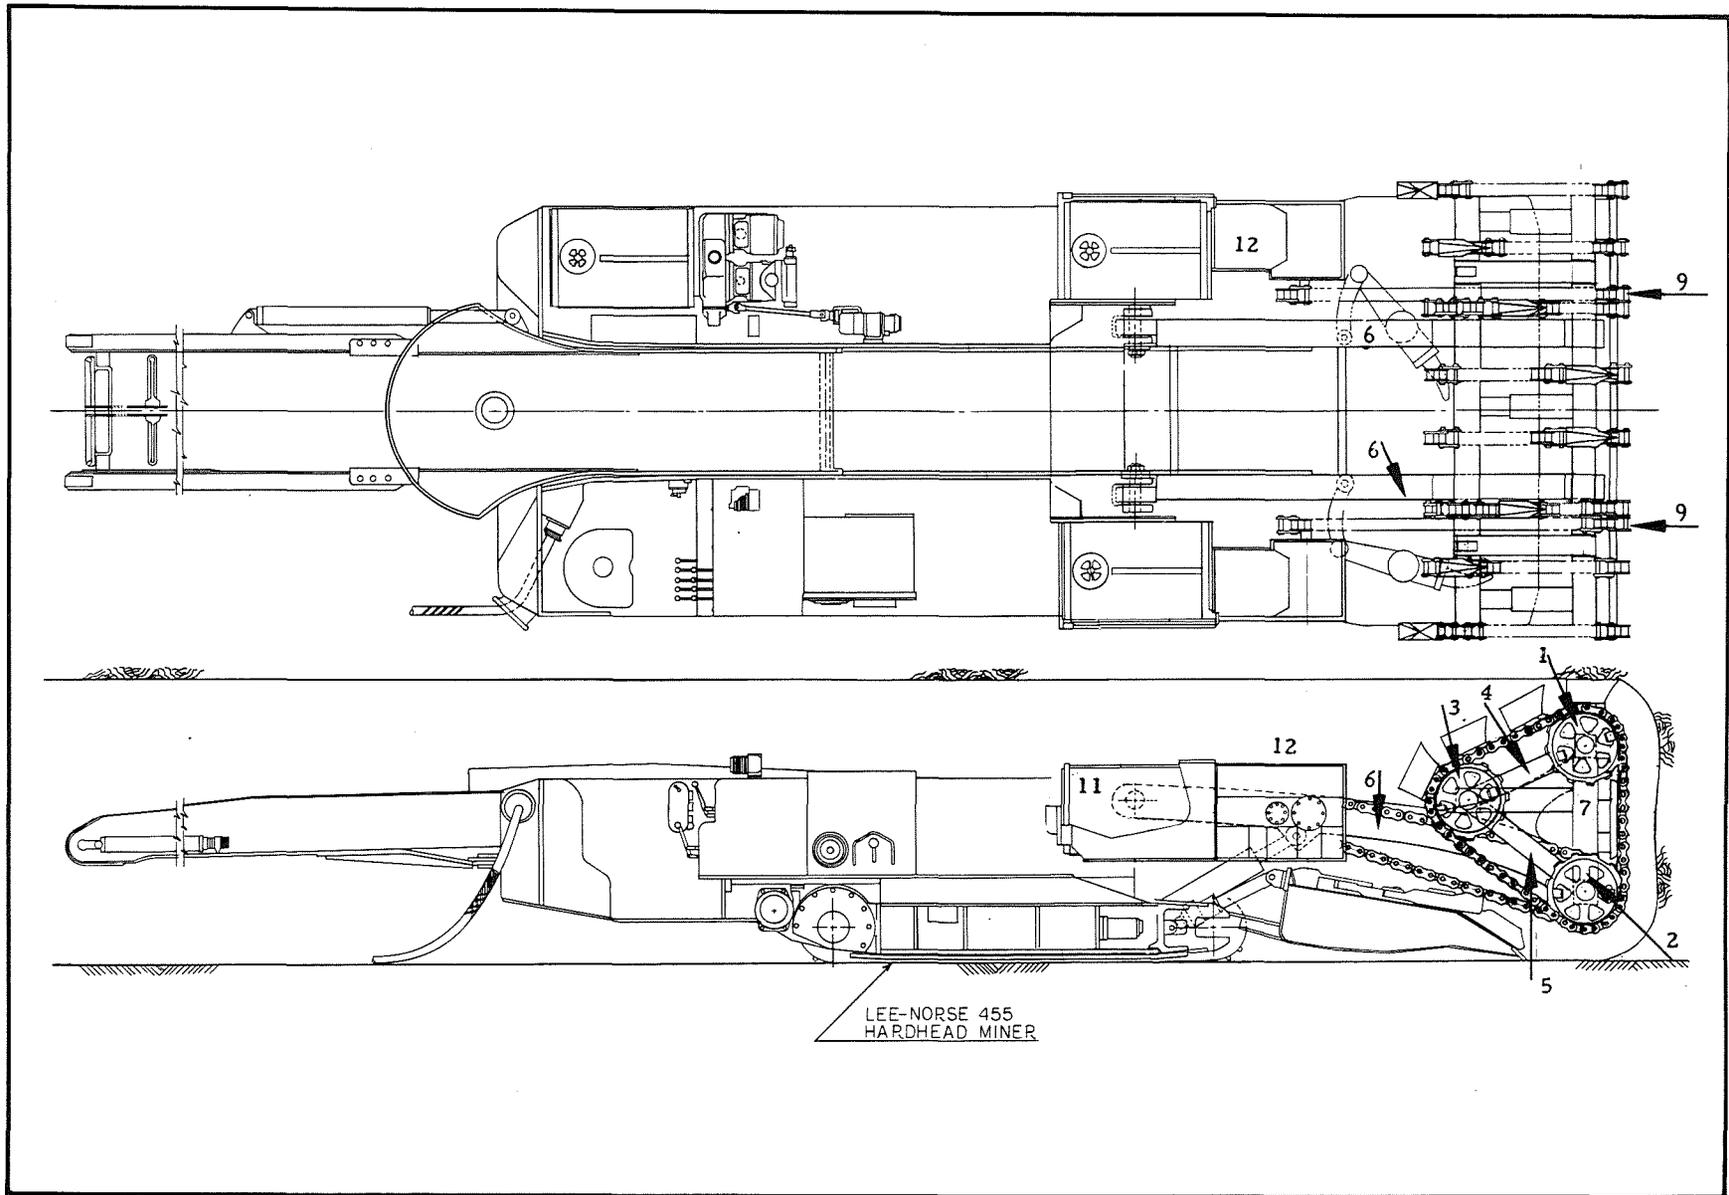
LAYOUR DRAWING, CHAIN RIPPER CONCEPT
